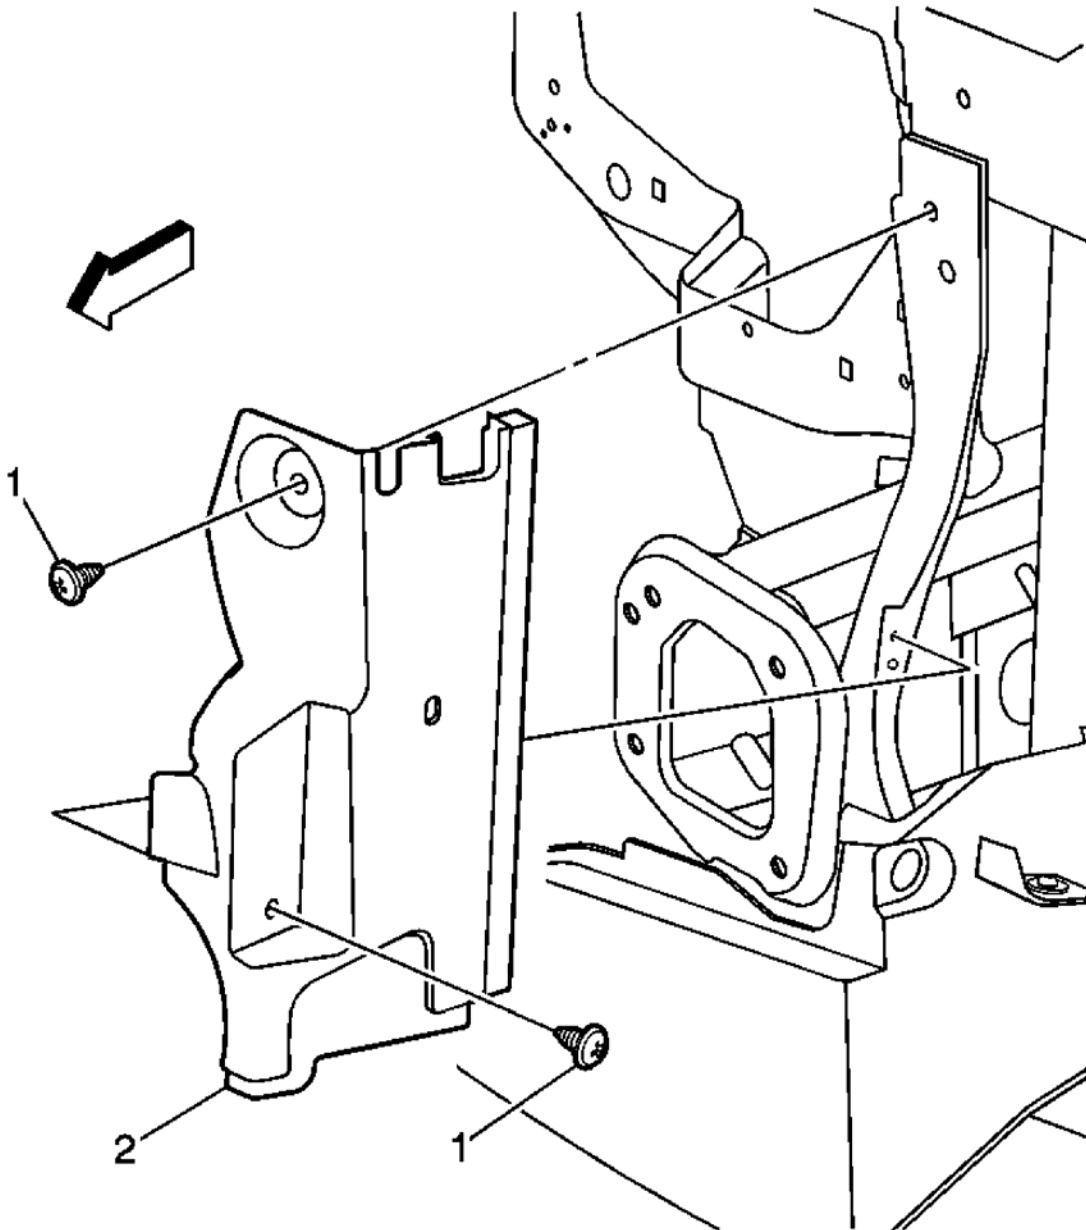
Radiator Air Side Baffle & Deflector Replacement (Right)
